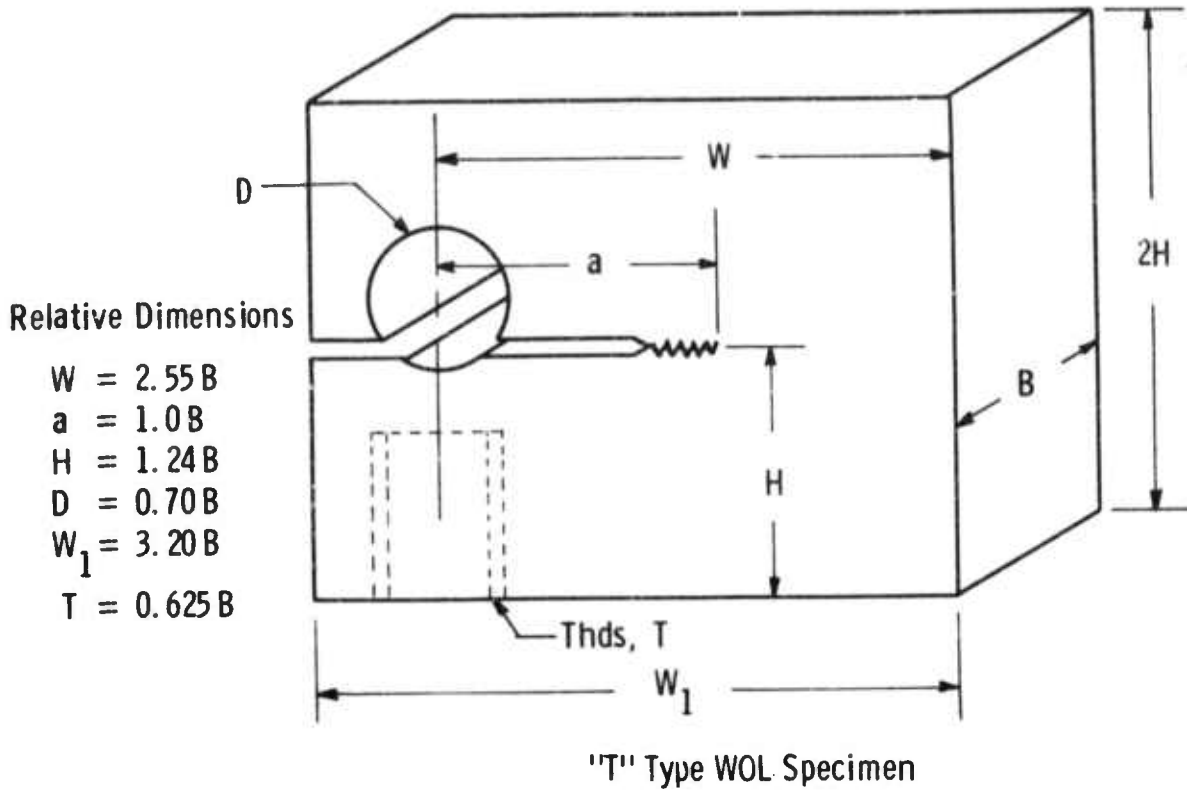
Compact fracture toughness specimens (relative dimensions in terms of thickness, B)
